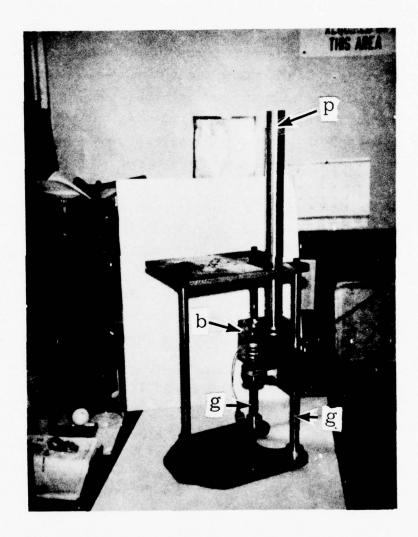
Pedestal Tube Assembly for Arc-Plasma Spraying.
